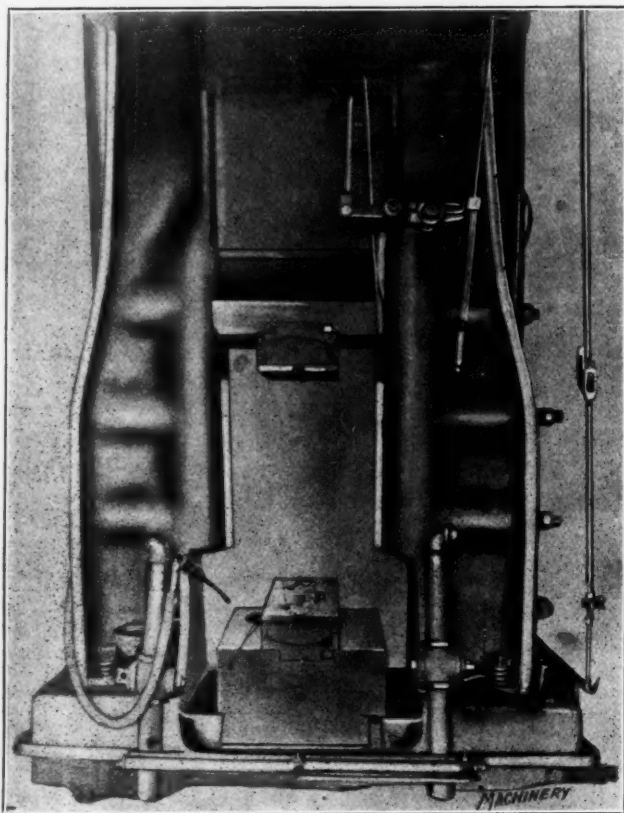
Chambersburg Steam Hammer with the Finish Drop-forging Dies in Place
